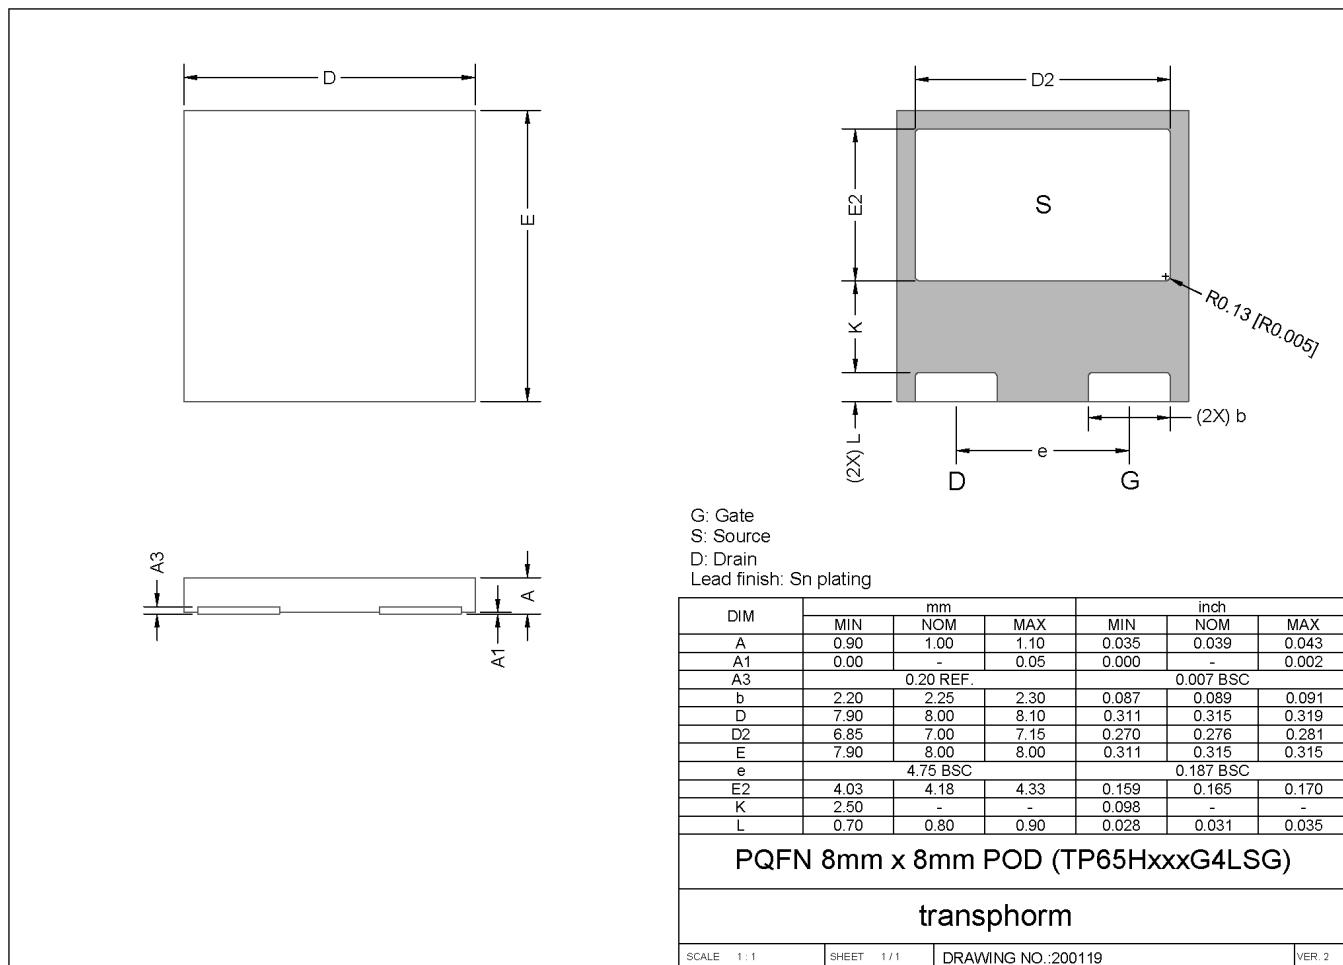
Package Outline Drawing – 8 × 8 mm PQFN
